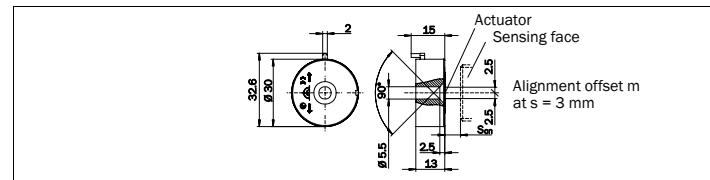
Dimensional drawing actuator RE31-K magnetic safety switch
